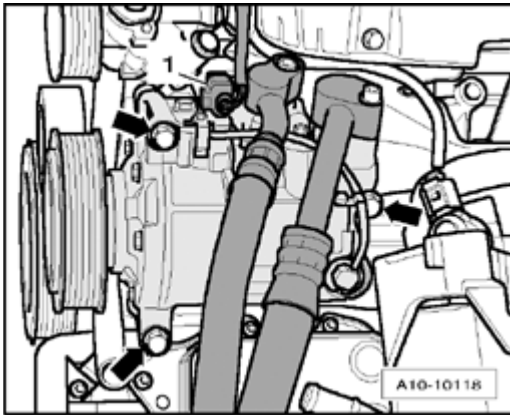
Disconnecting Connector For Wiring To Air Conditioning Compressor Clutch Solenoid
